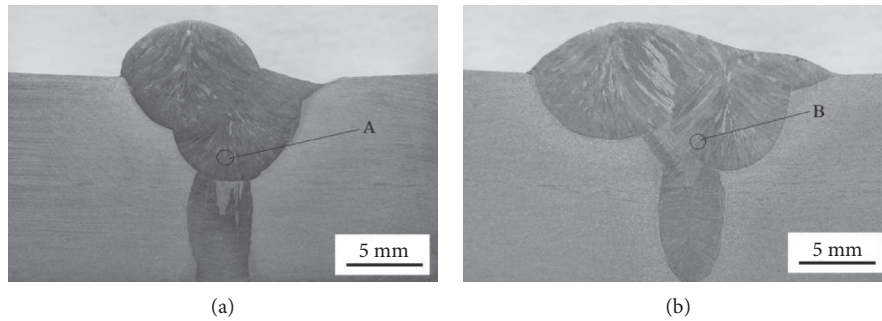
Macroprofile of the welded joints. (a) 98%Ar + 2%N₂. (b) 95%Ar + 5%CO₂.
